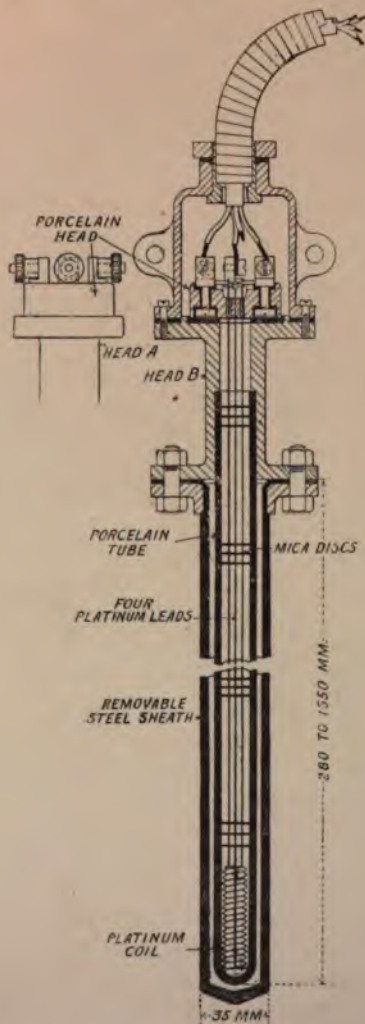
Resistance Thermometer for Annealing and Case-Hardening Furnaces, and Hardening Baths.
